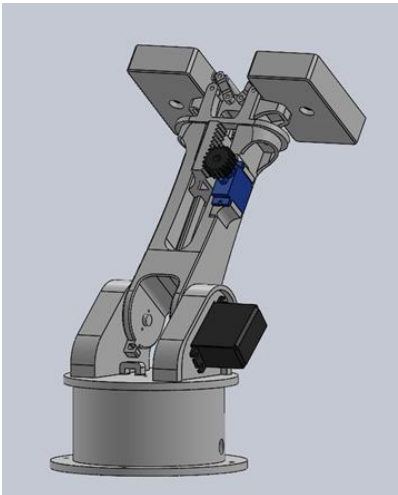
DUAL AXIS SOLAR TRACKER WITH FOLDABLE HOUSING UNIT IN ITS OPEN STATE.
